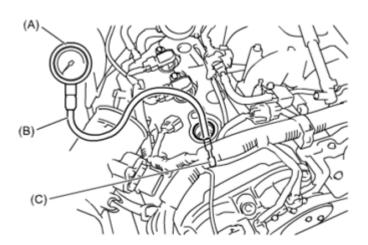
Identifying Special Tools (Compression Gauge) Into Spark Plug Hole Courtesy of SUZUKI OF AMERICA CORP.
